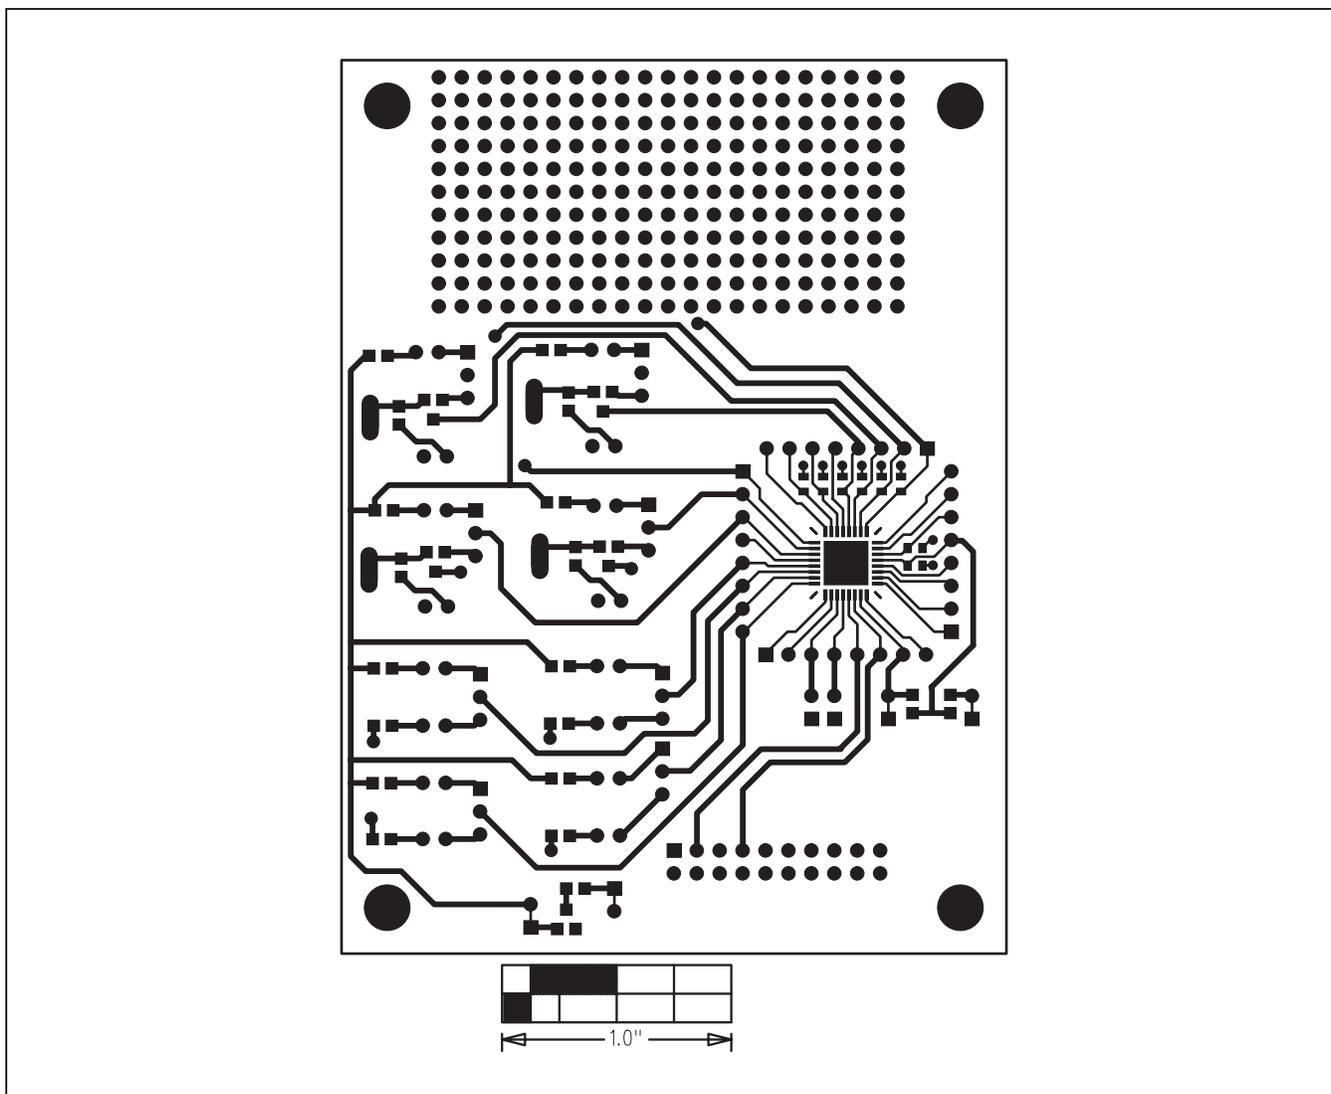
MAX6870 EV Kit PC Board Layout—Component Side
